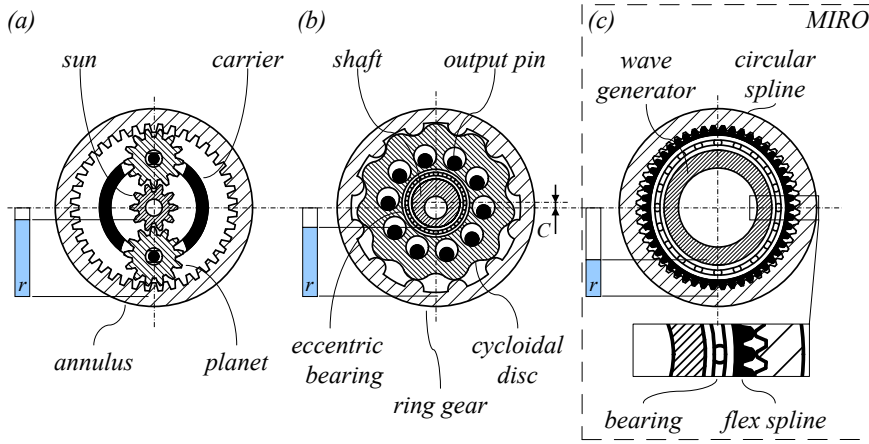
Three reduction gear principles: planetary speed reducer (a), cycloidal speed reducer (b), Harmonic Drive reduction gear (c)
